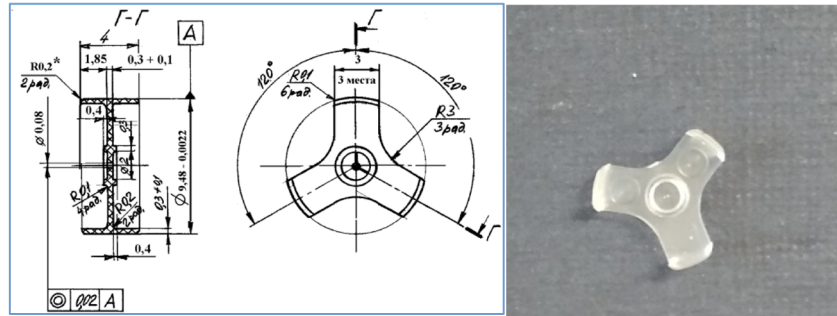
Technical drawing (left) and photo (right) of the internal backing of the signal spacer wire.
